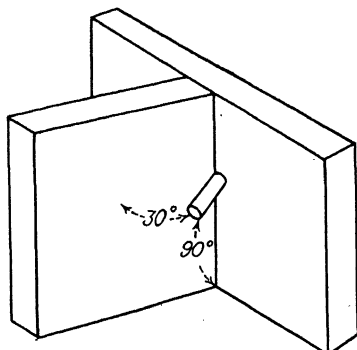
In making a vertical fillet weld point the electrode toward the flat plate rather than directly into the joint.
